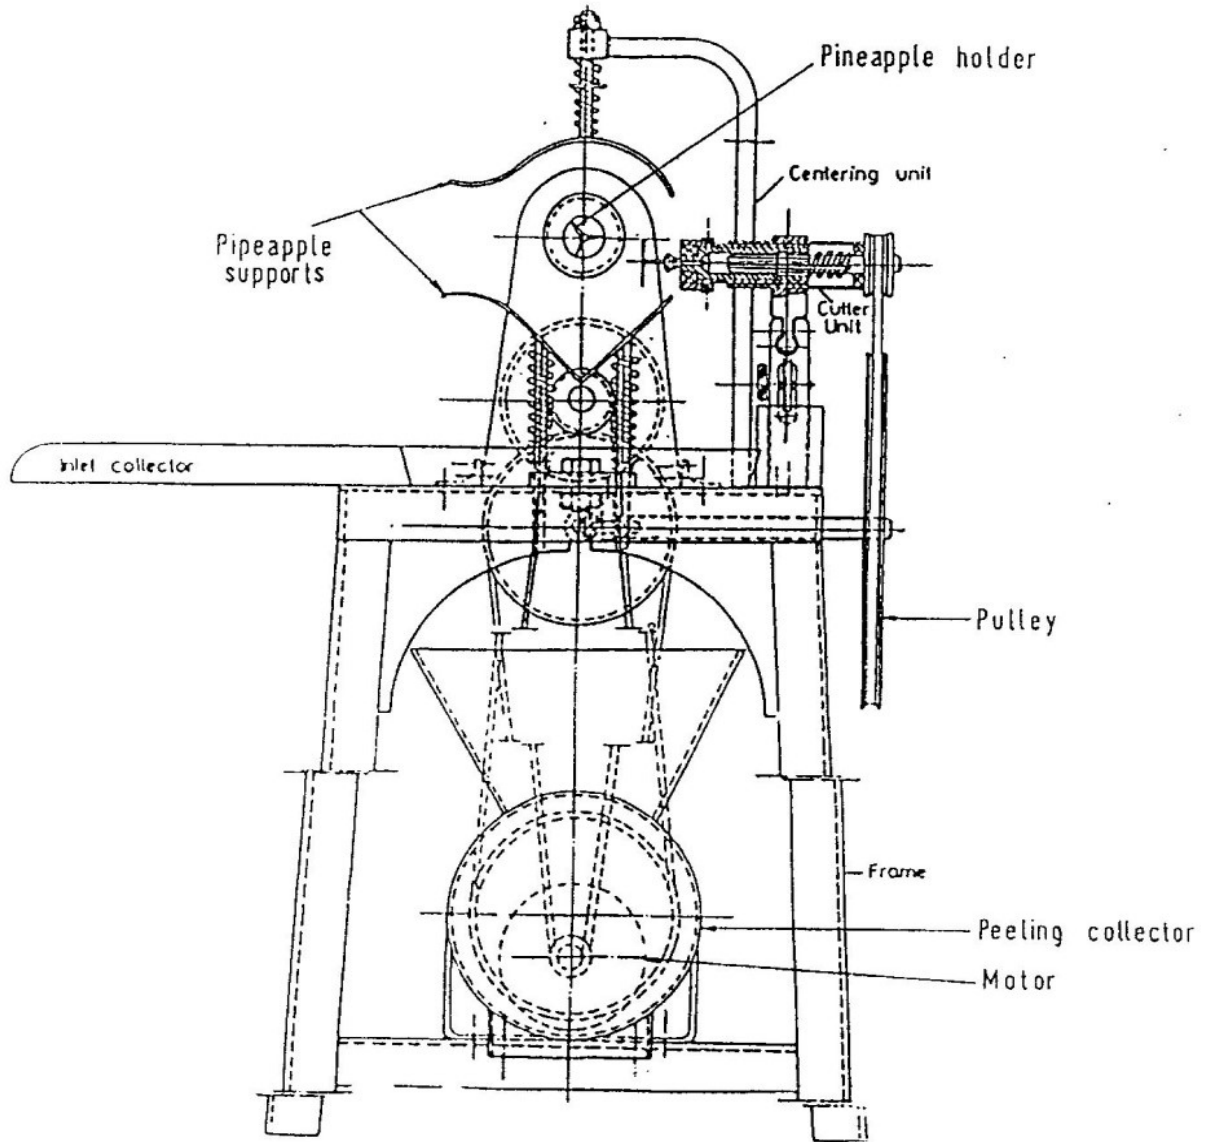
Side view of the assembled pineapple peeling machine, showing major components of the machine.
